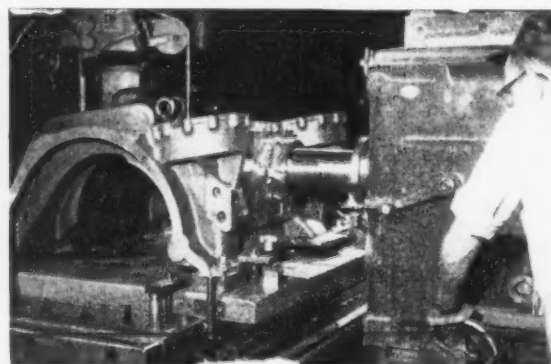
A horizontal spindle Cincinnati Hydrotel is used to machine a valve body face in a rear transmission housing.
